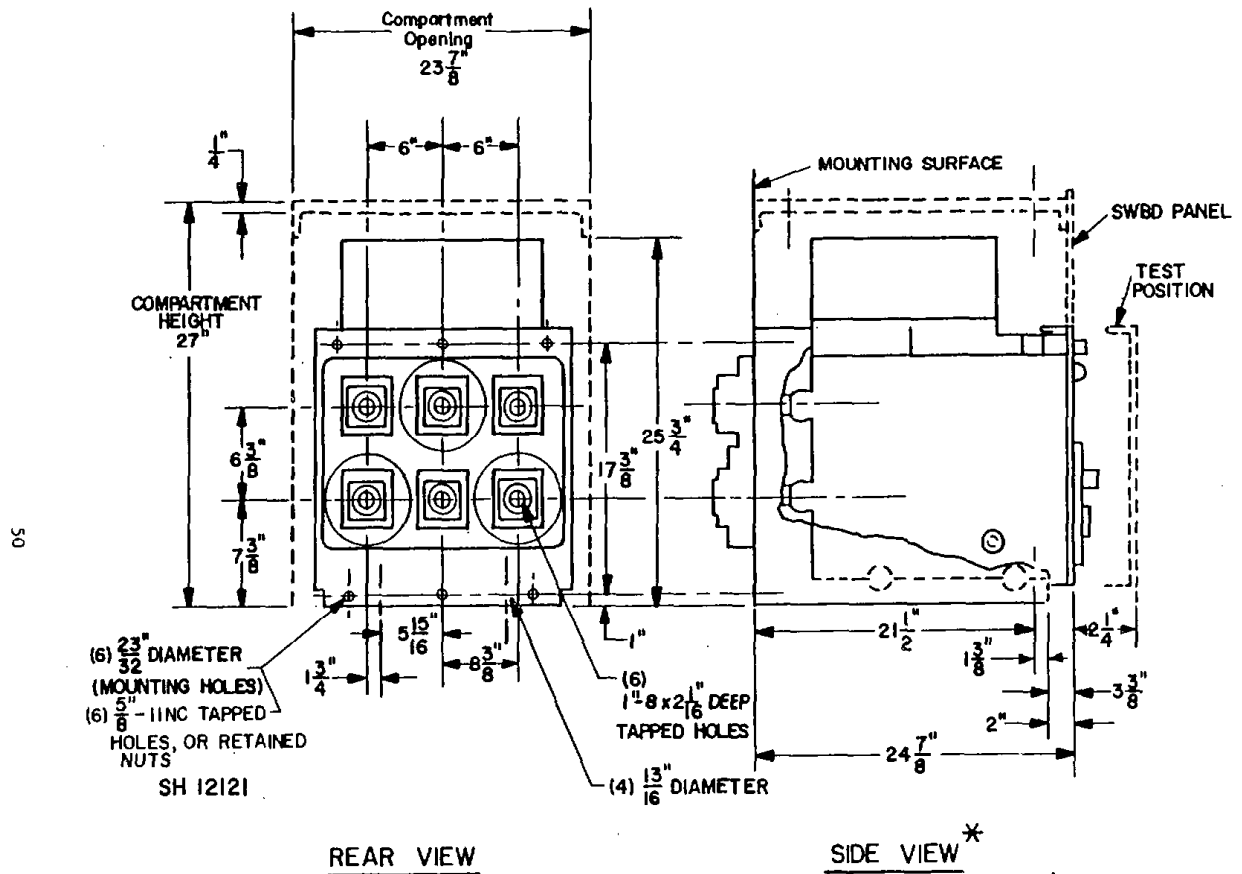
Outline and mounting dimensions for circuit breaker type ACB-902R.
